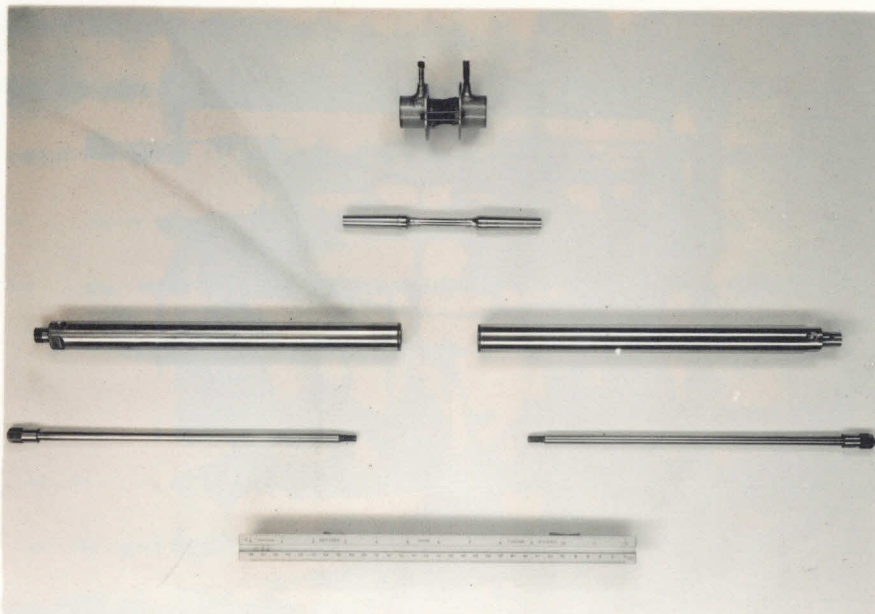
Gland, D Series Specimen, Sprindles and Drawbars.
